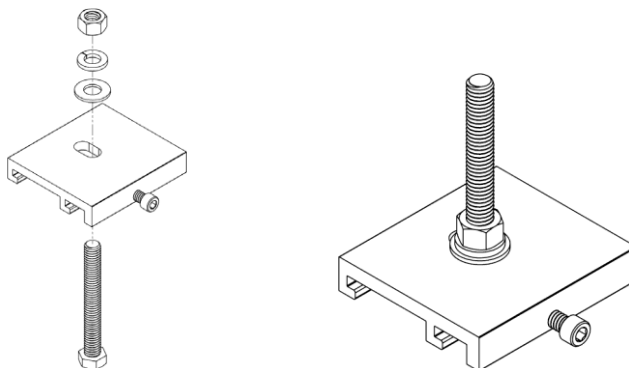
Flat Washer, Lock Washer, Hex Nut Assembly
